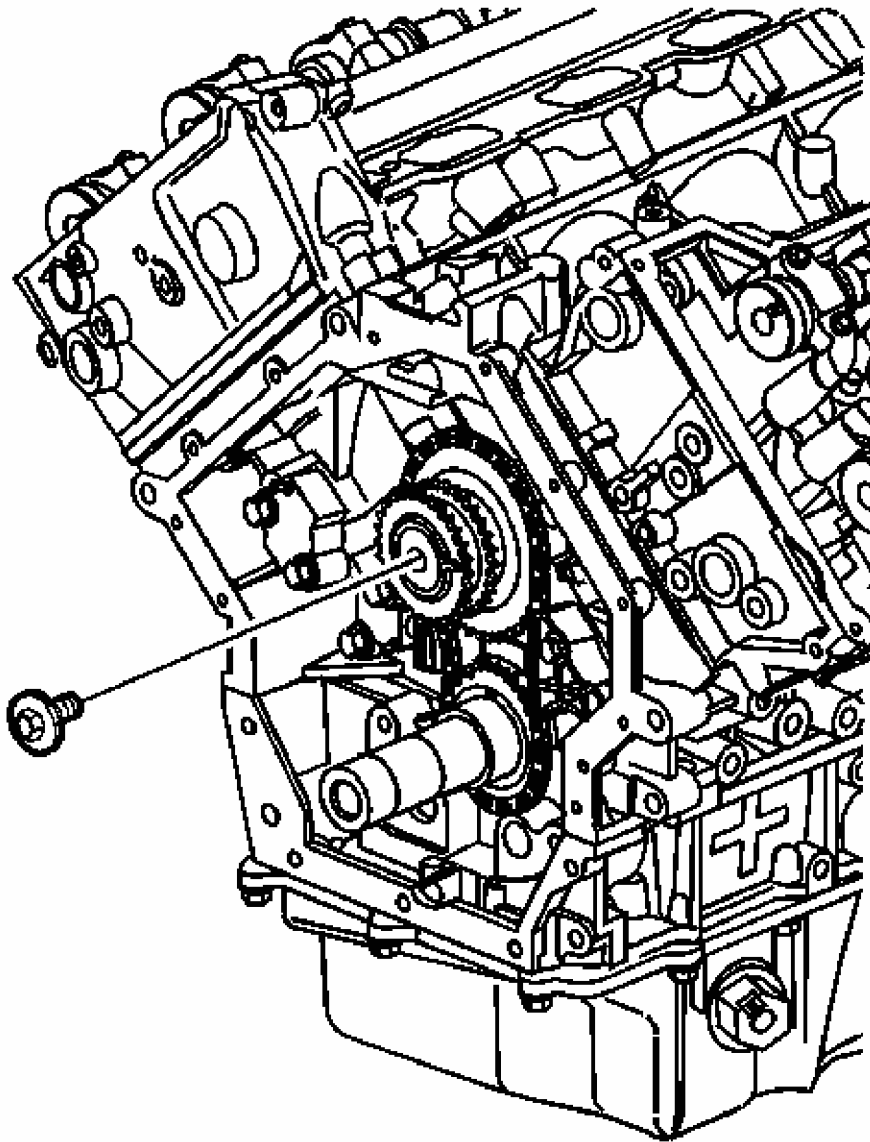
Identifying Camshaft Intermediate Drive Shaft Sprocket Bolt
